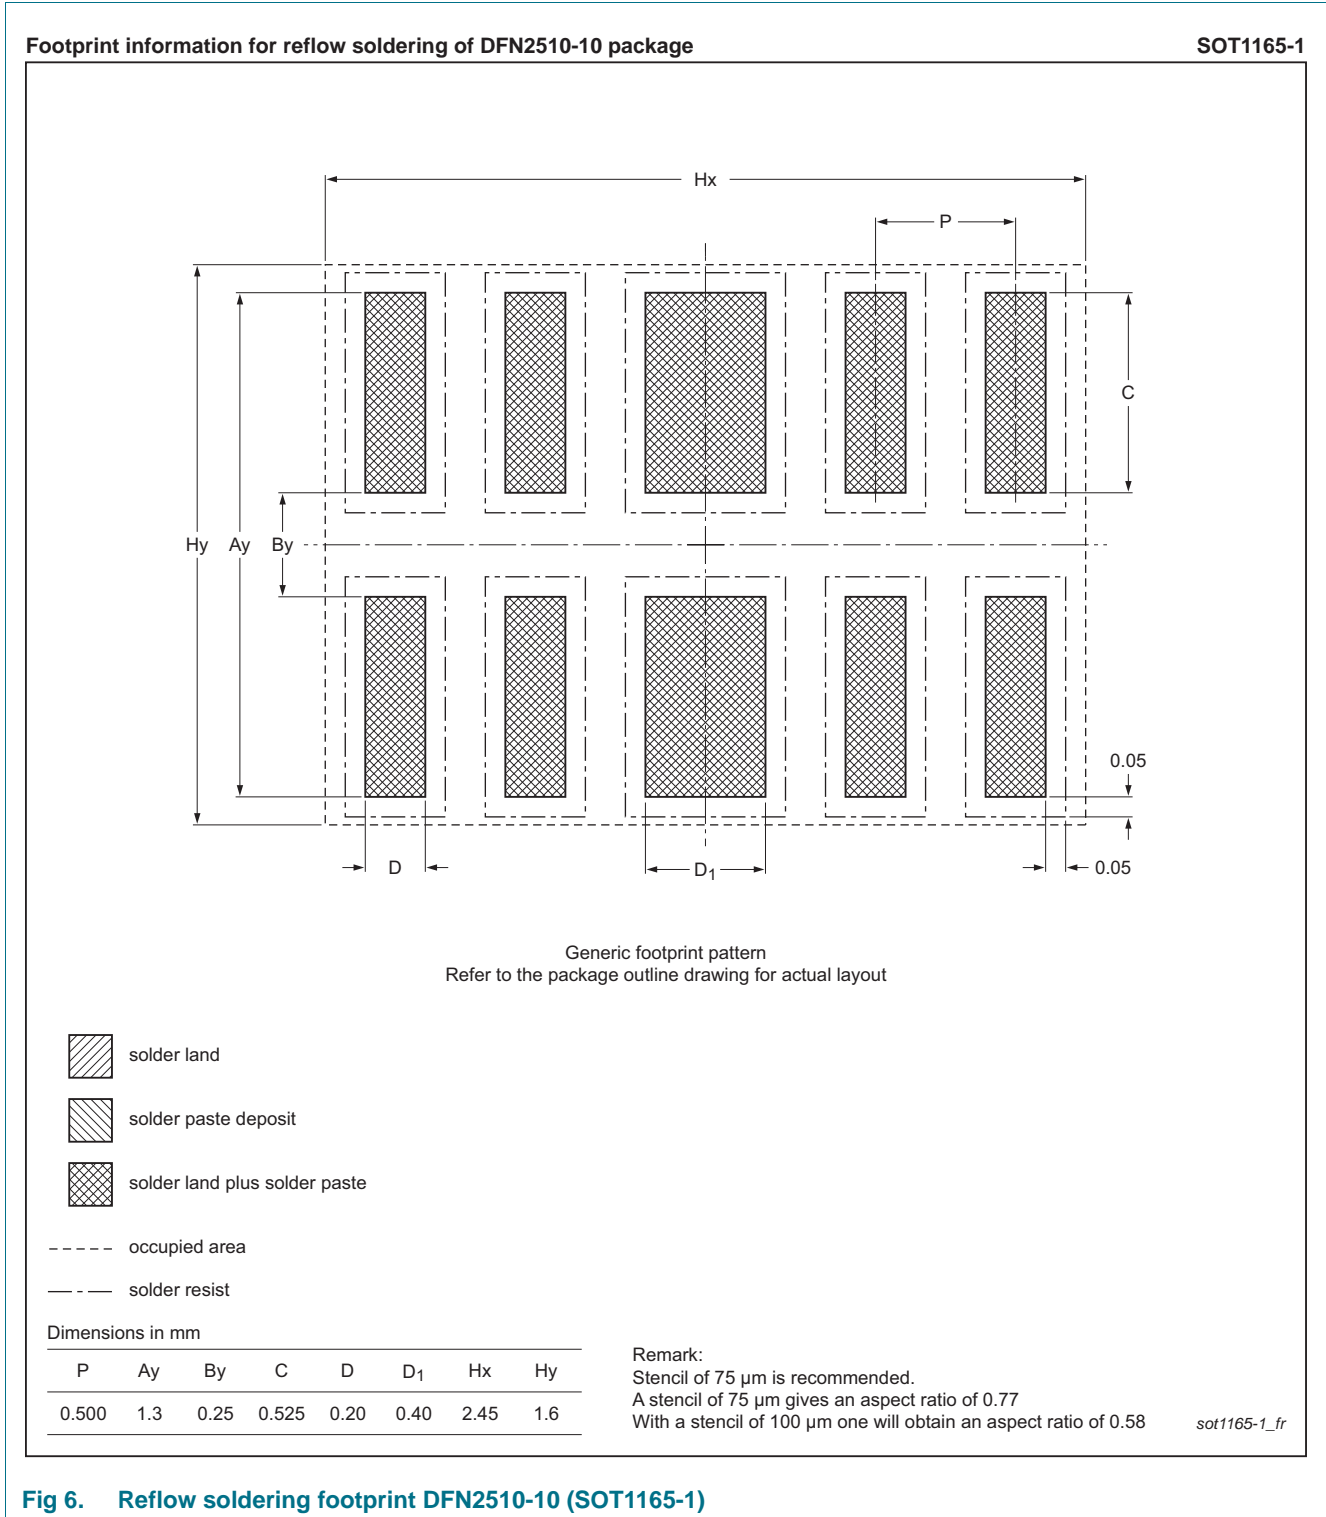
Reflow soldering footprint DFN2510-10 (SOT1165-1)
